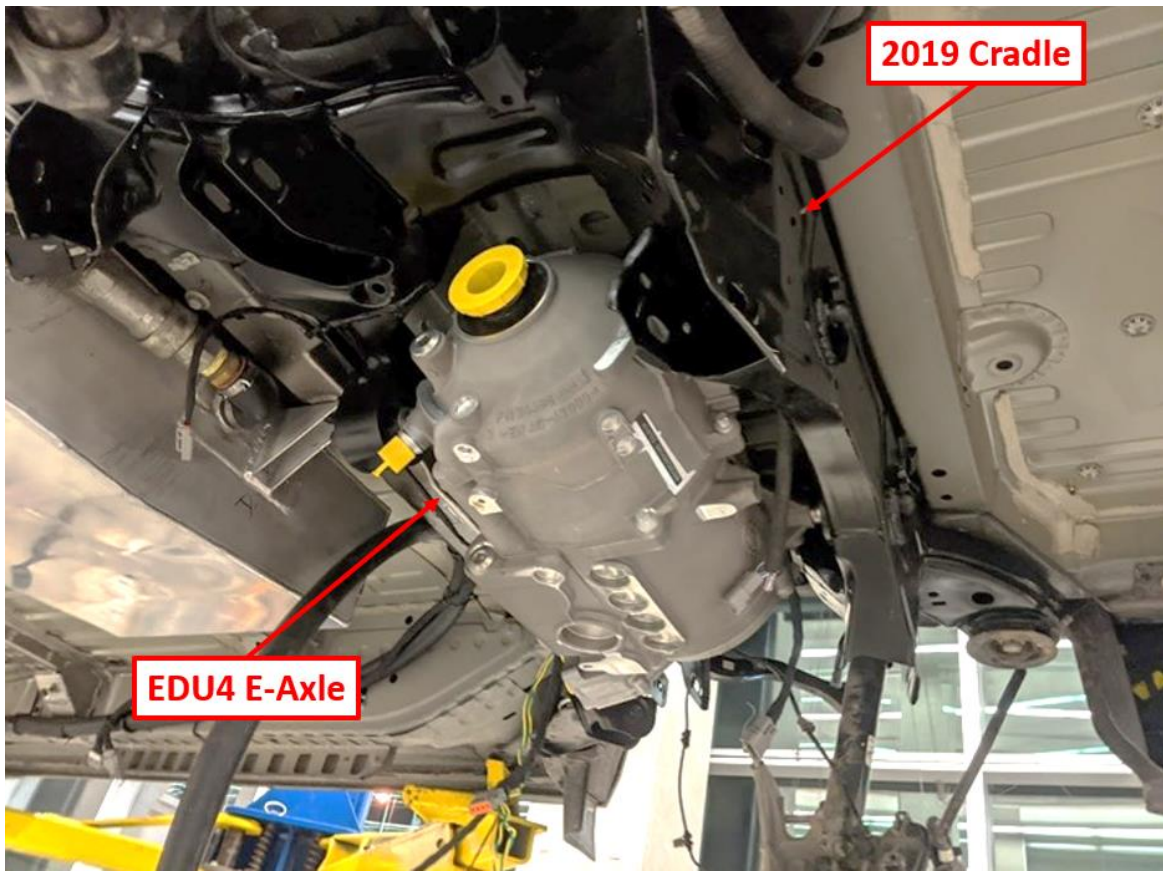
E-axle and 2019 cradle mounted to the UWAFt vehicle
